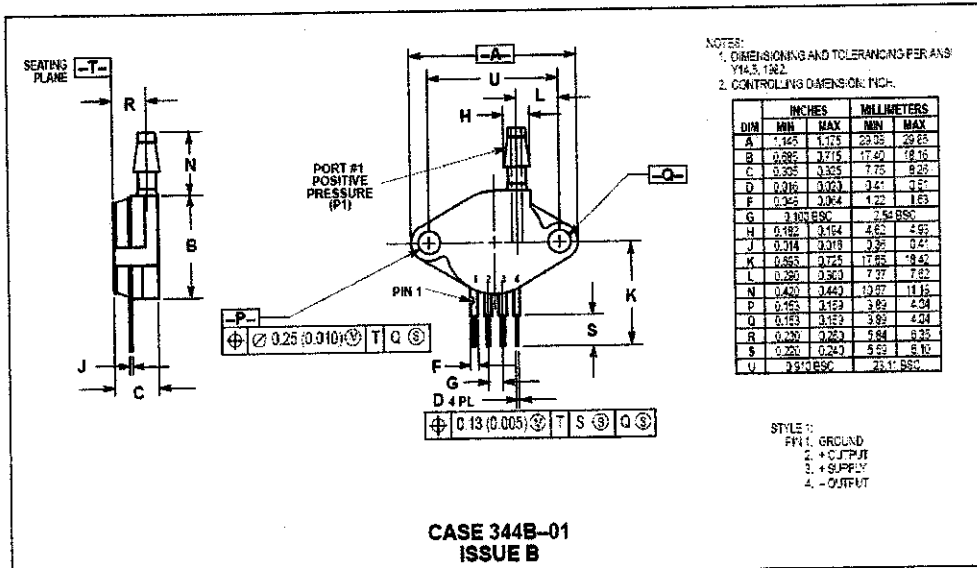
Motorola MPX50GP Pressure Sensor Dimensions [6]
